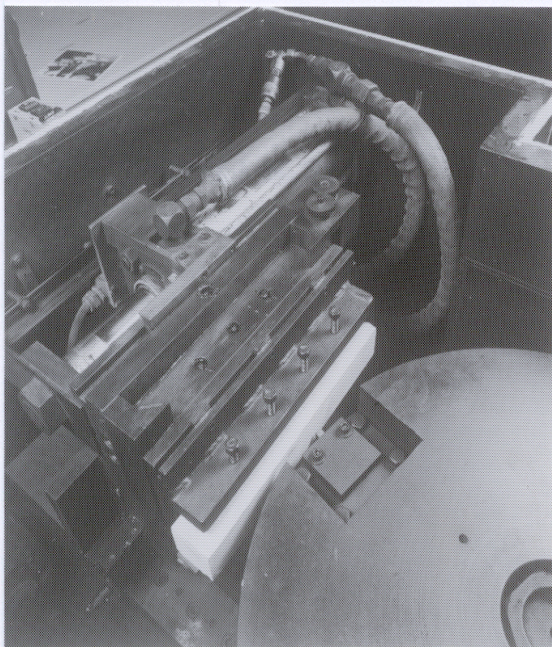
Sandstone holding fixture and flywheel. Sandstone block and shank material are in test position (lower center). Note: 3-1/4-in hydraulic cylinder is located inside chamber (upper center).
